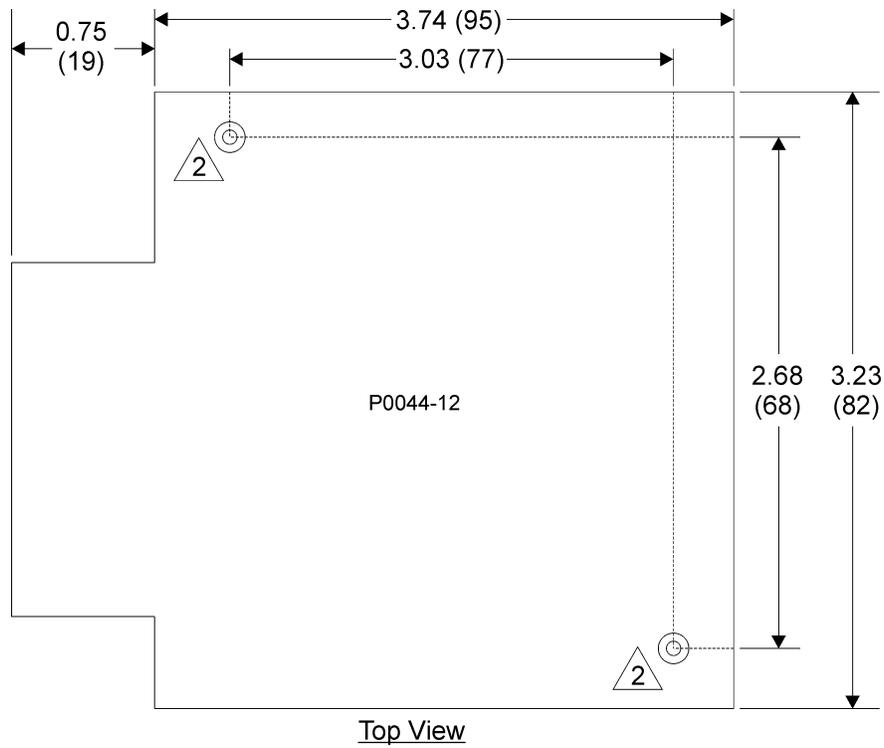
Ethernet Switch Mounting Rail Dimensions
